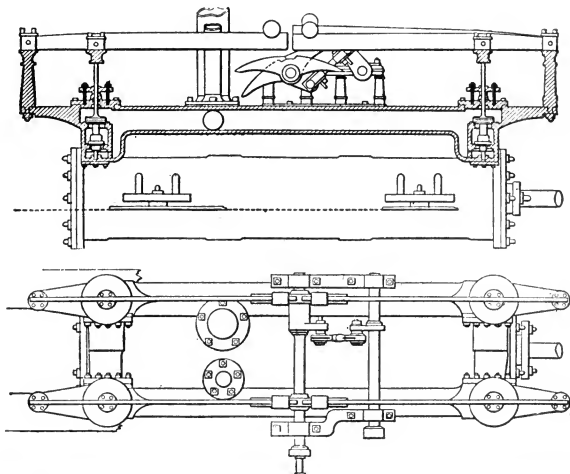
,046.—Rees high pressure stern wheel rotary valve engine.
